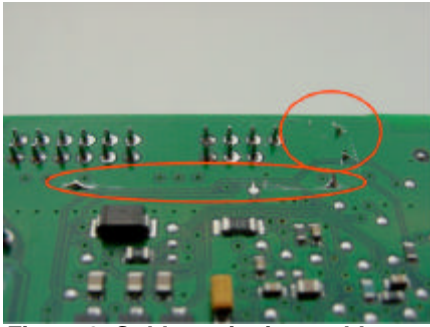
Solder stringing; solder residues can be found just around the nozzle area.
